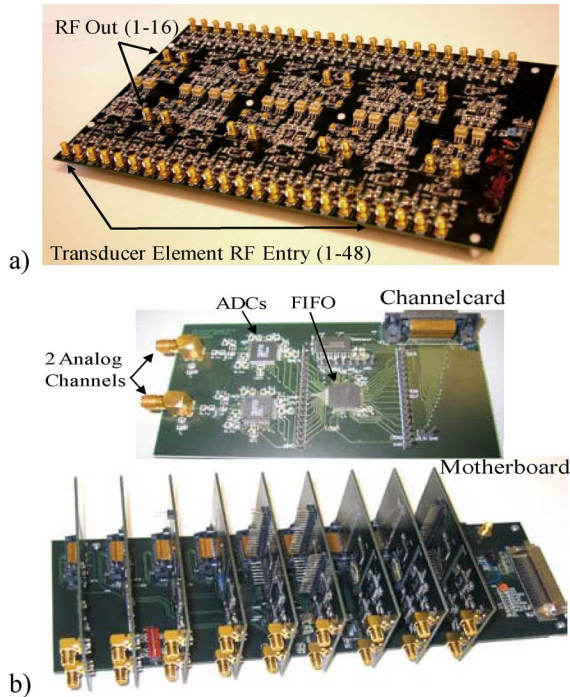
Photograph of the fabricated a) 16 channel analog receiver board implemented on a four-layer PCB and b) digital PAM system with motherboard and channelcards implemented on a six-layer PCB.
